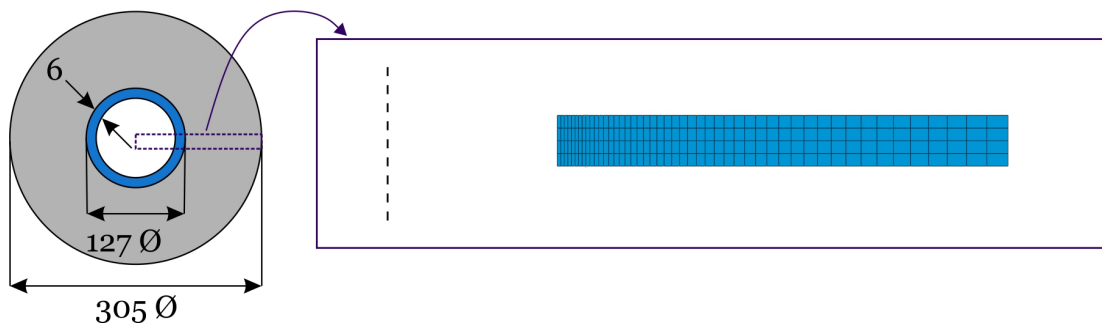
Model for clad deposition on inner diameter of cylinder - Illustrating the transformation of the weld clad cylinder into an axisymmetric model. Dimensions in millimetres.
